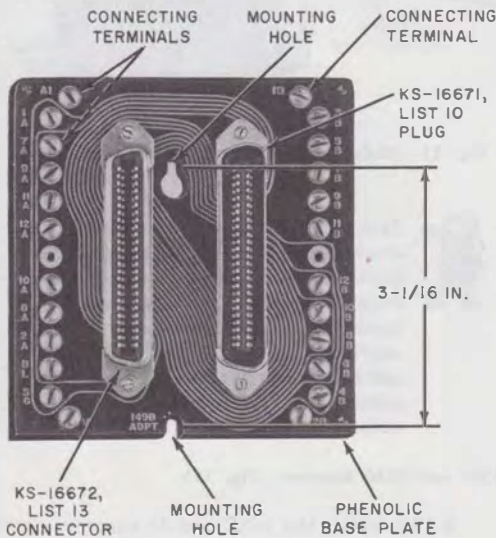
149B Adapter—Printed Wiring Board Assembly
